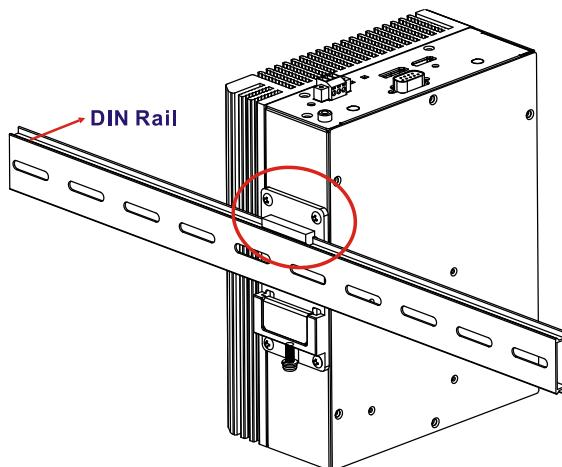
Attach the Mounting Bracket to the DIN Rail
